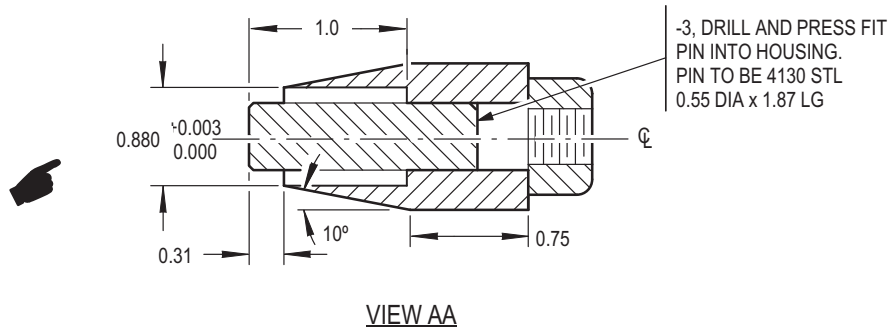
Transmission Accessory Pump Bypass Filter Removal Tool
